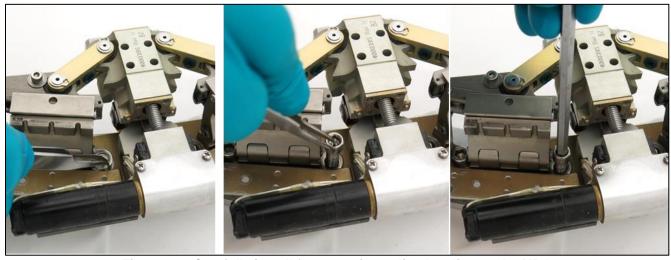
Carefully install fasteners immediately adjacent the MBA
